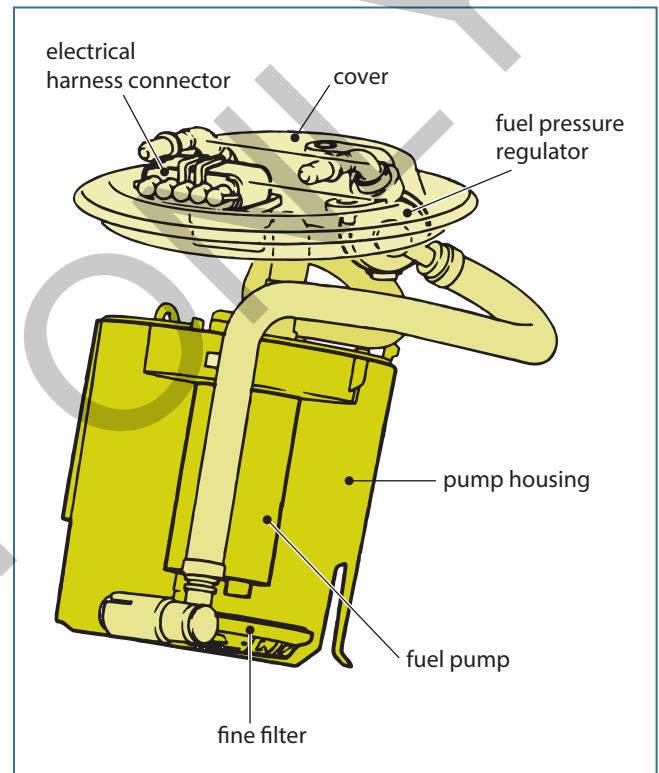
Submersible fuel-pump assembly that includes the pressure regulator HOLDEN LTD
